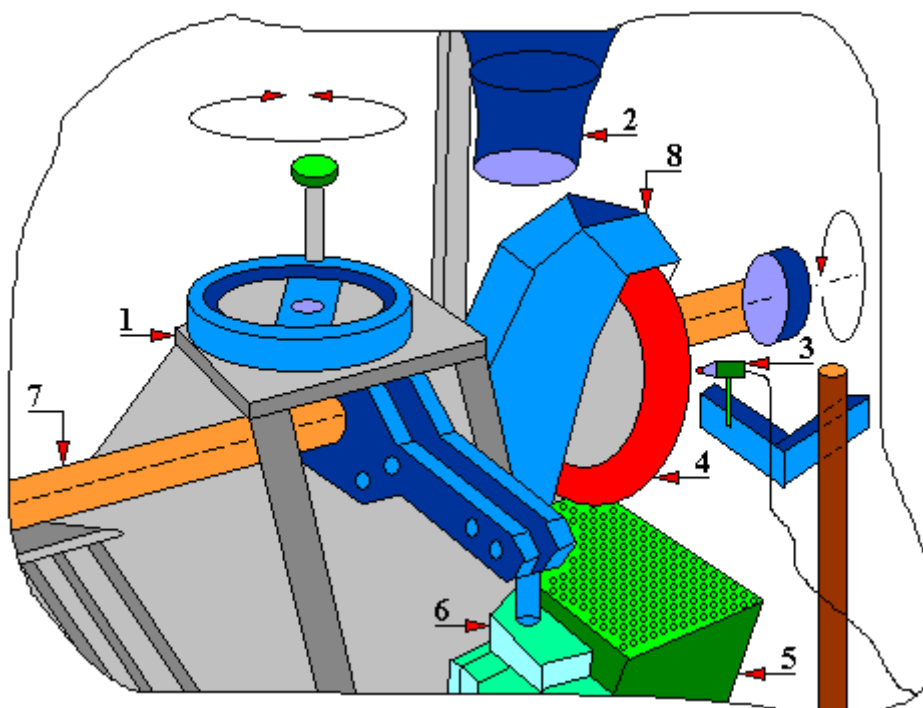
A general view of the brake on the Krauss RWDC 136B test rig
